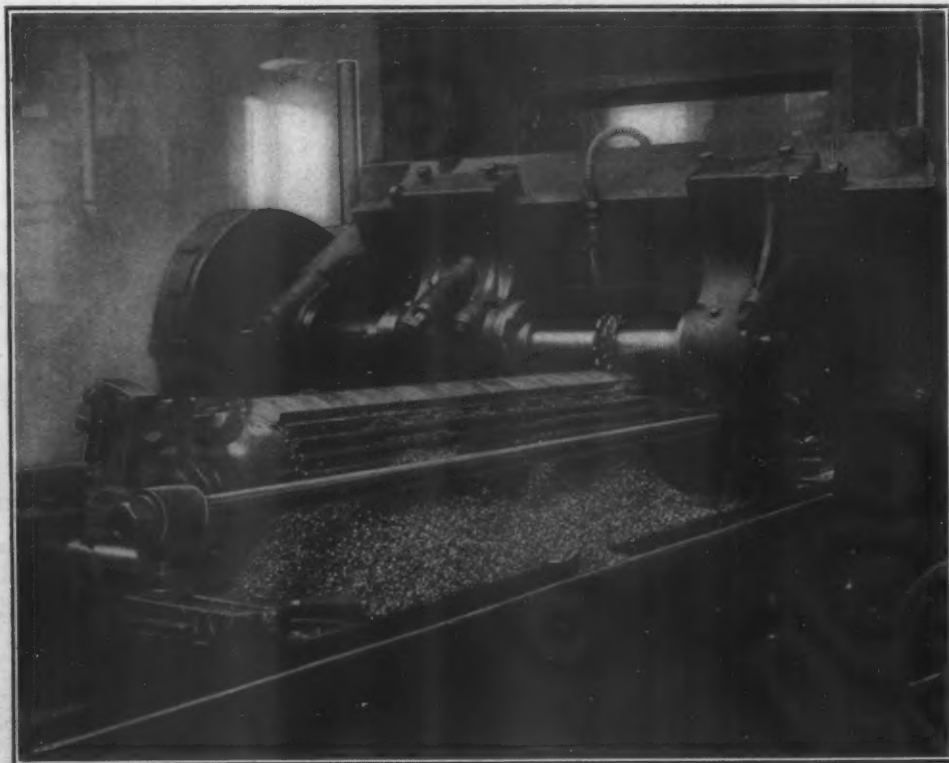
Cutting a Steel Spur Gear on a Newton Horizontal Milling Machine.
